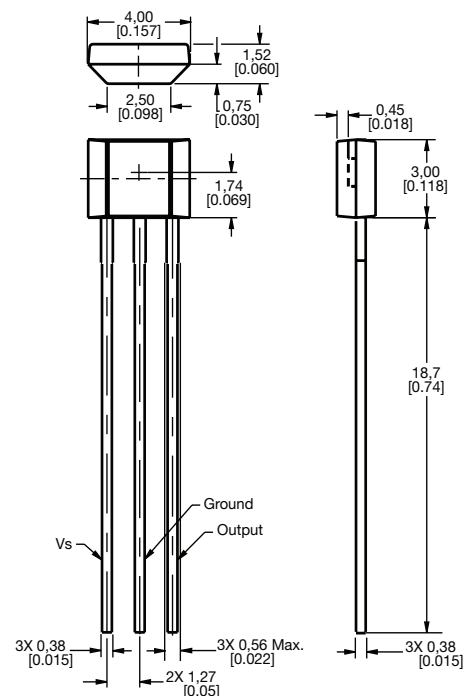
SS400 Series Flat TO-92-Style Mounting and Dimensional Drawings (For reference only: mm/[in].)
